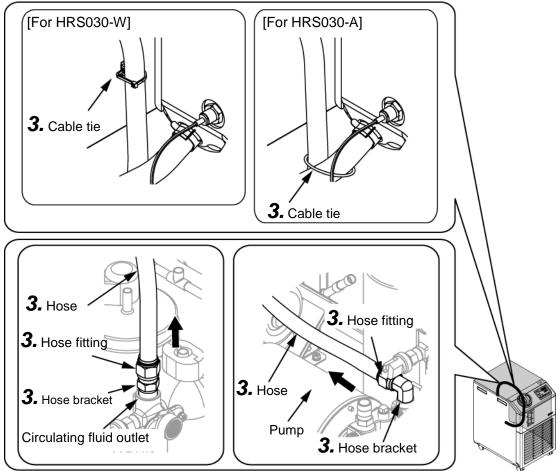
Removal of plastic hose (Between pump-circulating fluid outlet)
